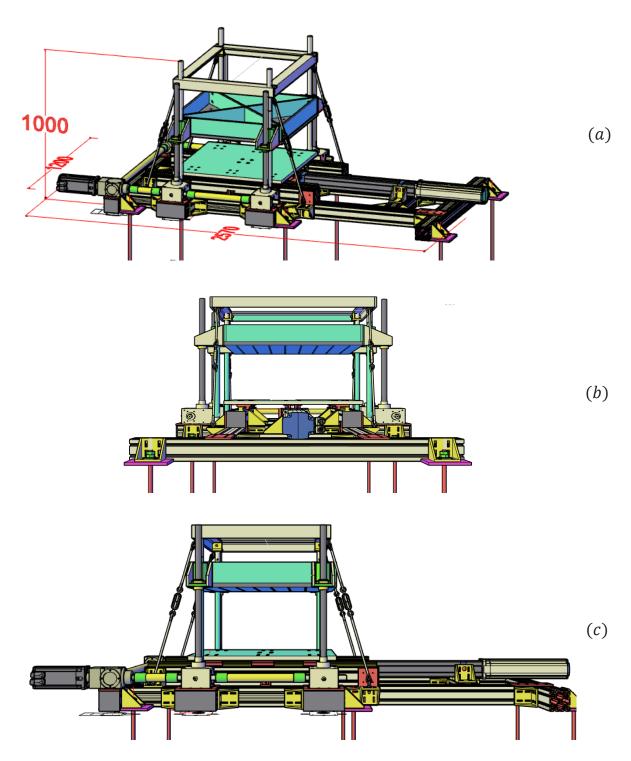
(color online) Different views of a CAD model of the shake table to be built: a) Overall isometric view, b) Front view, c) Side view
